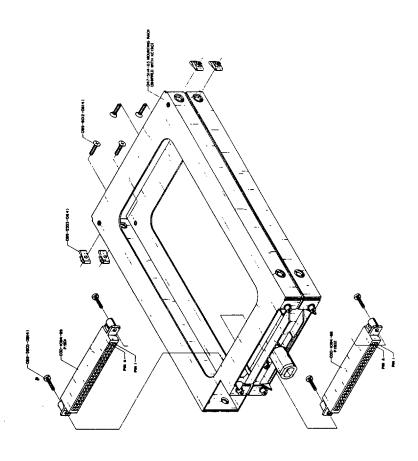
D EC 190 INSTALLATION DRAWING (Sheet 2 of 2)
